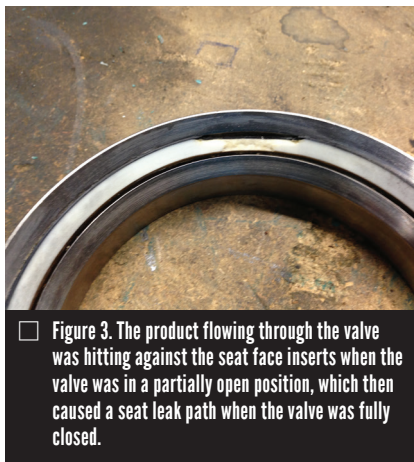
The product flowing through the valve was hitting against the seat face inserts when the valve was in a partially open position, which then caused a seat leak path when the valve was fully closed.
